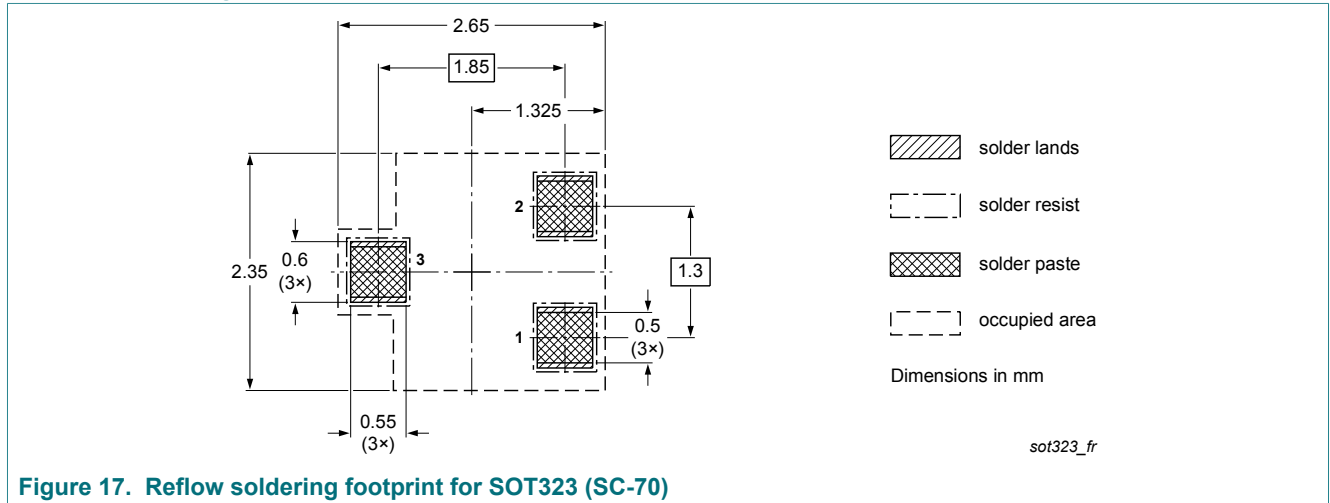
Reflow soldering footprint for SOT323 (SC-70)
